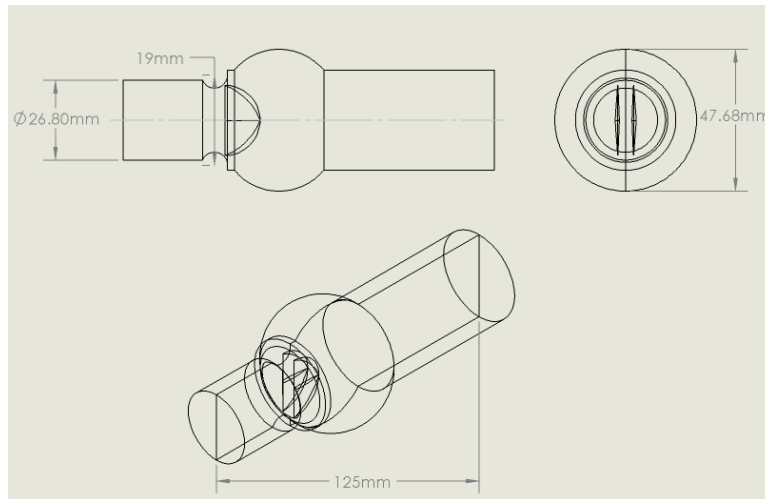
3D Valve fully open at 0° (All units in millimeters)
